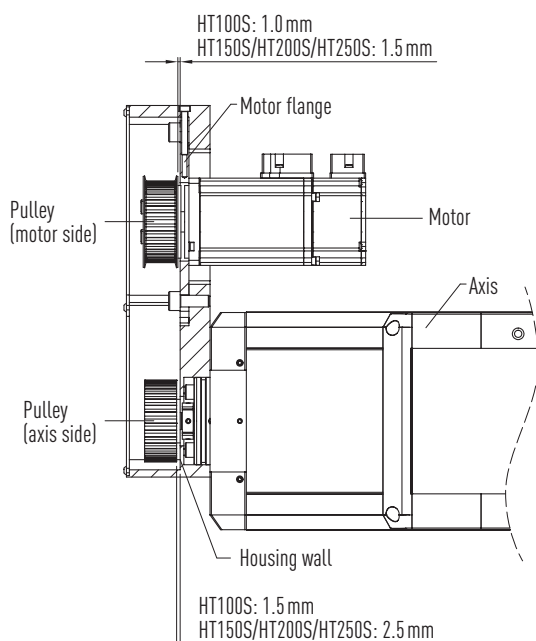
Safety distances between the pulley's flanged wheel (motor-side) and motor flange and between pulley (motor-side) and housing
